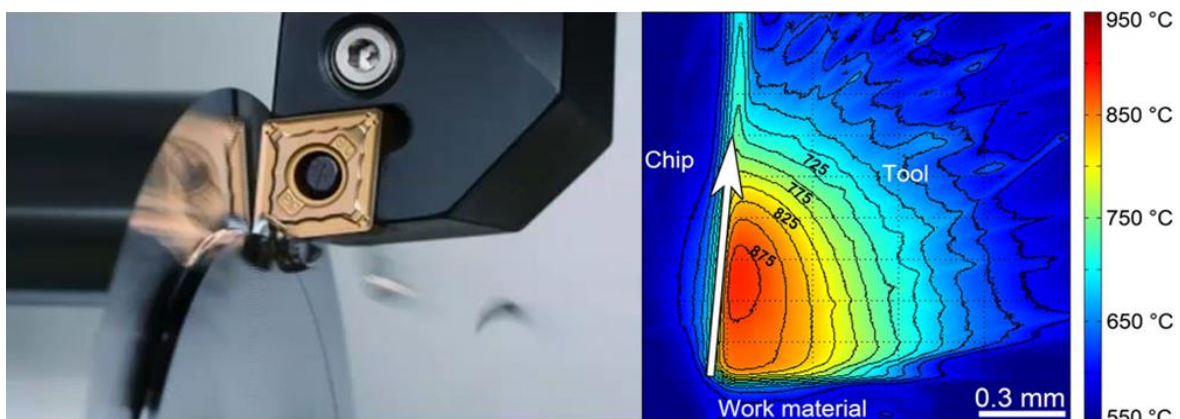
Side view of the chip formation on a TiAlN cutting insert (left) and temperature distribution inside the cutting insert during chip formation (right). Modified from [3].
